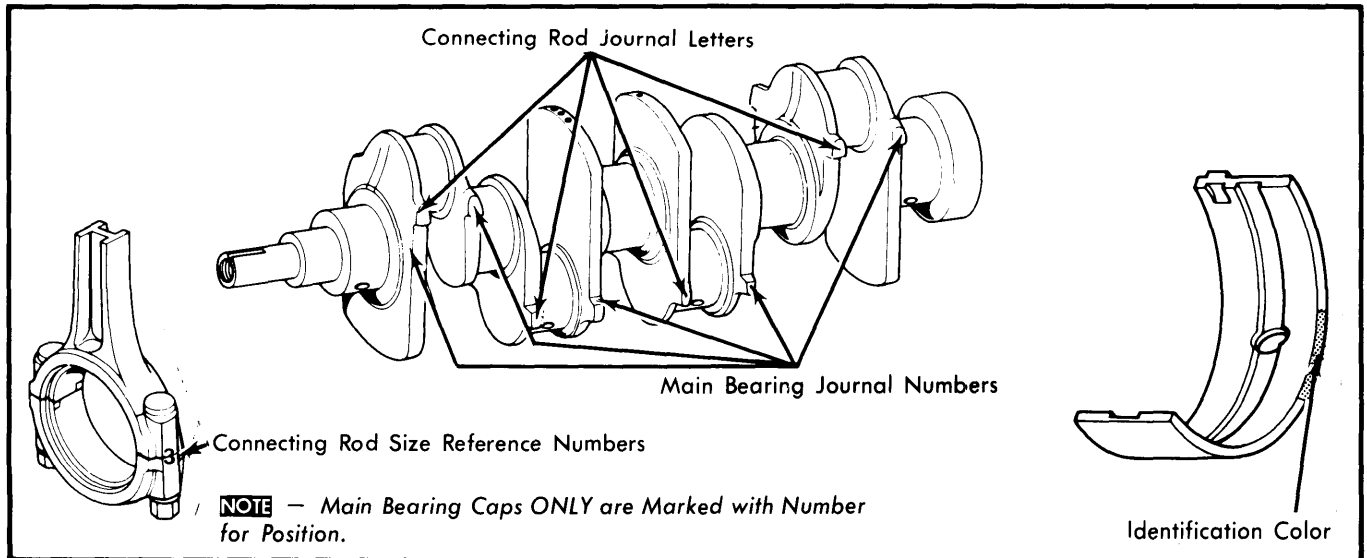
Connecting Rod Bearing & Cylinder Block Identification Locations
